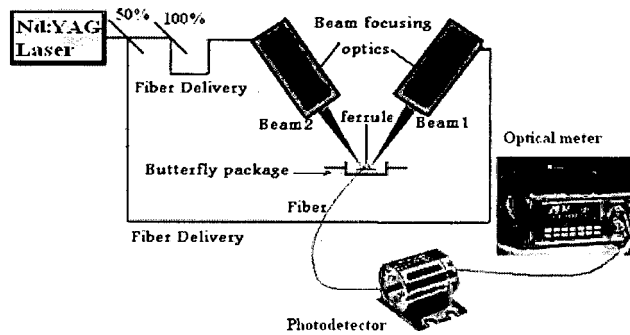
Dual beams Nd:YAG laser welding for butterfly modules
